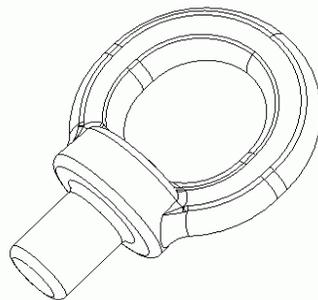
Forging Model of a High Tensile Eye Bolt
